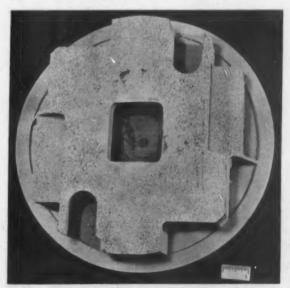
Cellular 356 aluminum alloy mounting plate casting.
